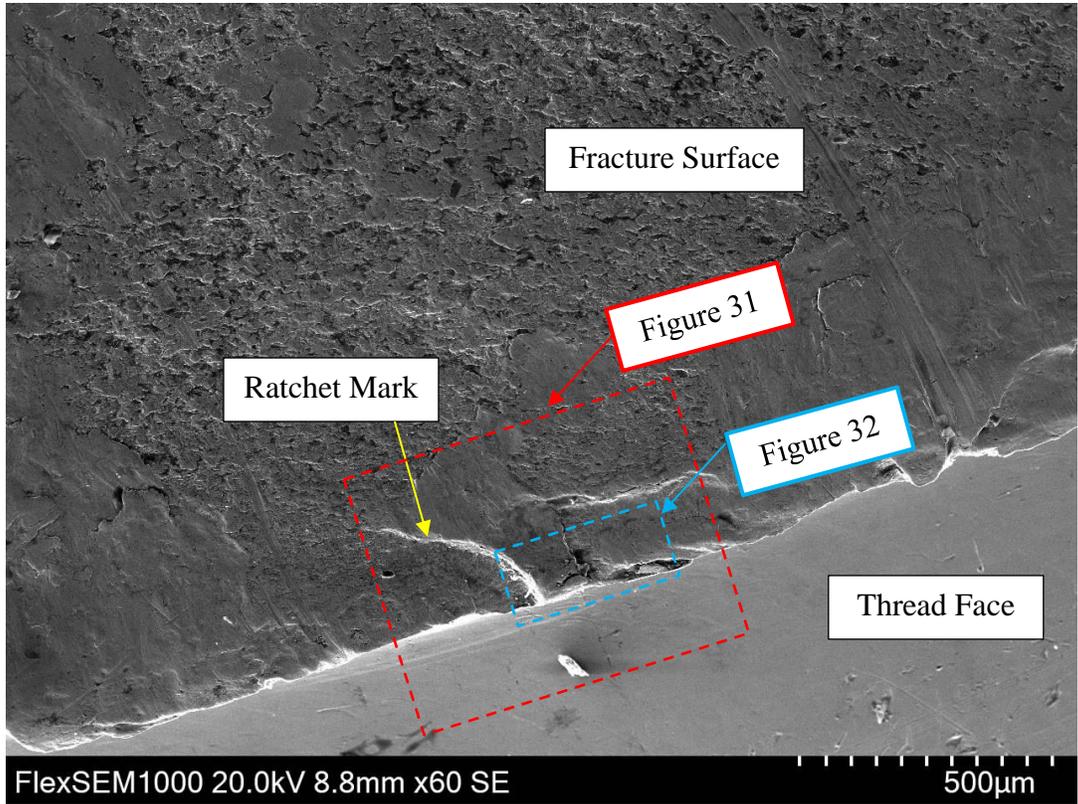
FRACTURE SURFACE/THREAD FACE. 6 O’CLOCK BOLT C2
